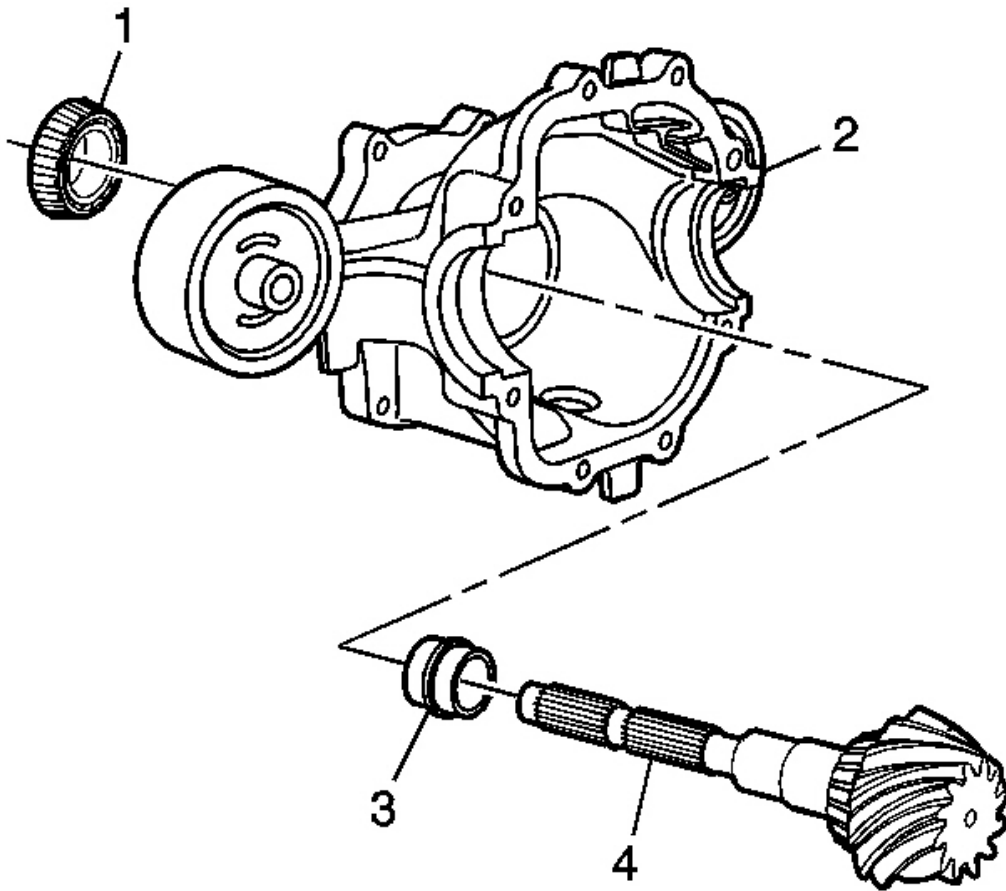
Installing Pinion Shaft, Collapsible Spacer & Bearing
